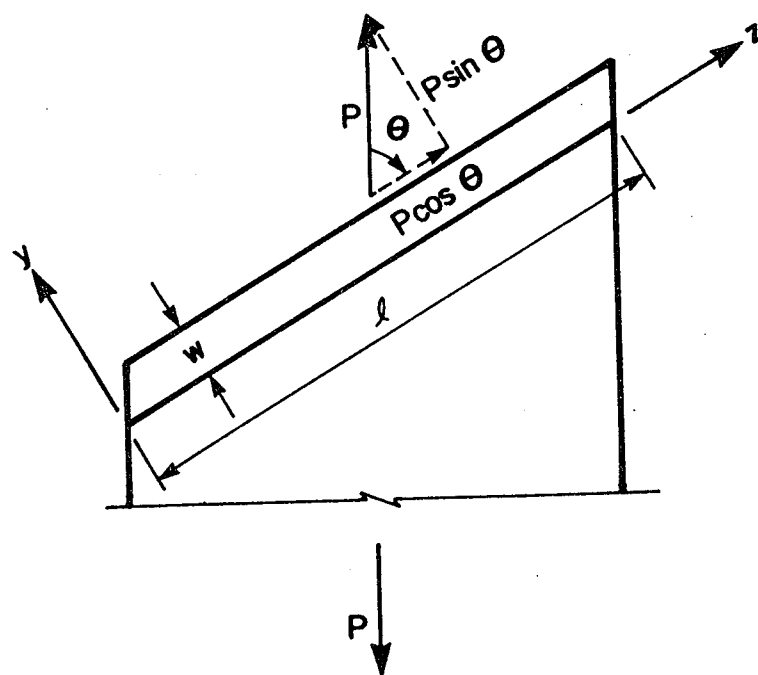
Plan Of Fillet Weld Loaded At A General Angle
